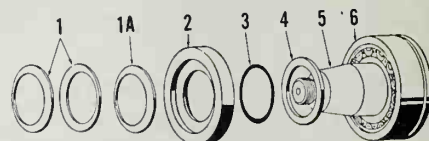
Exploded view of thrust ring components. Belleville washer (1A) is only used on Model 95A437.
